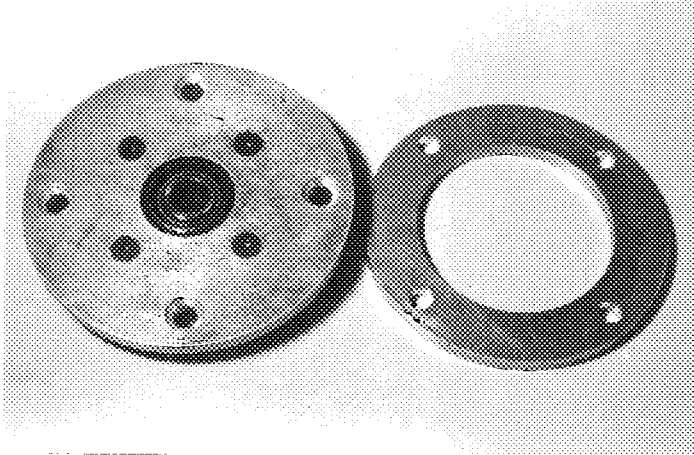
REINFORCED STRUT TOP MOUNT
